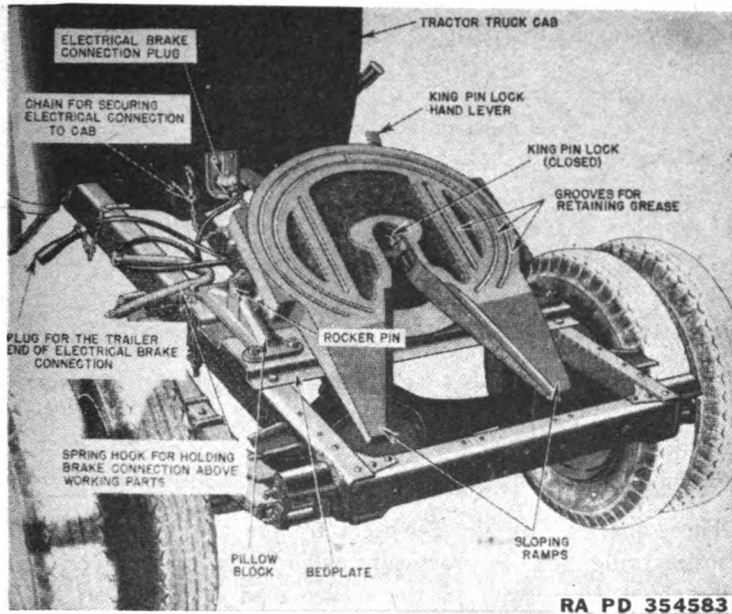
Lower Fifth Wheel Mounted on Tractor (Semi-automatic Coupling).
